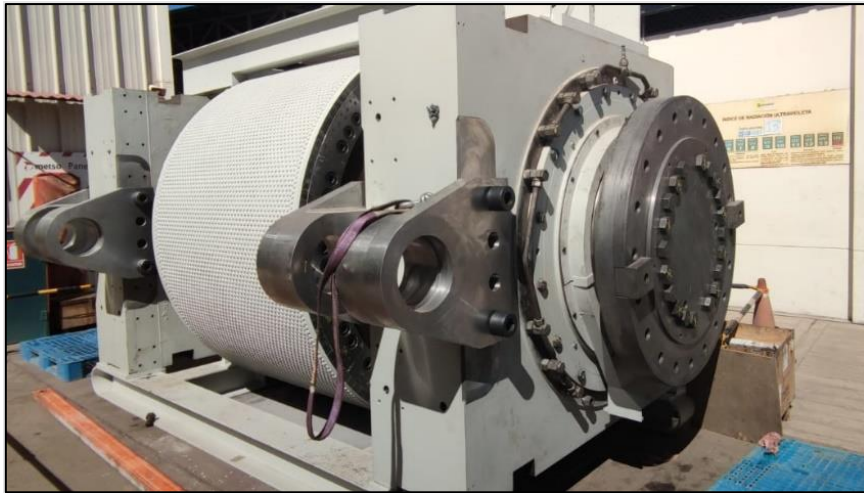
Installation of AMSC brackets to the floating roll bearing housings (Knorr et al, 2023)
